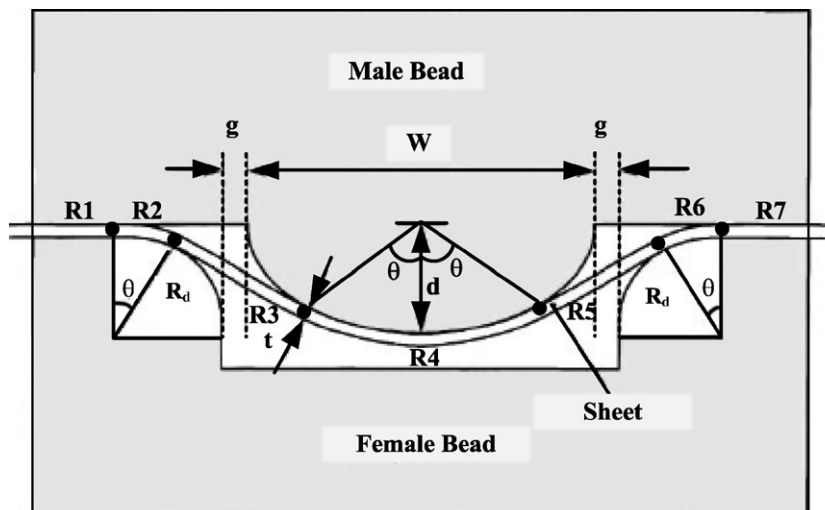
Section view of a single circular drawbead with geometrical parameters.
